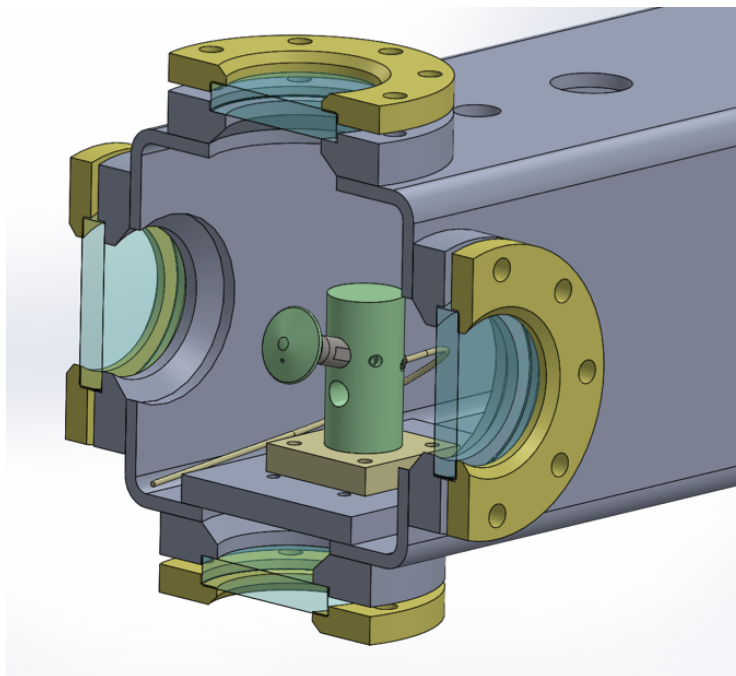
Section view of the test section with the model mounted at a 16° angle of attack.
